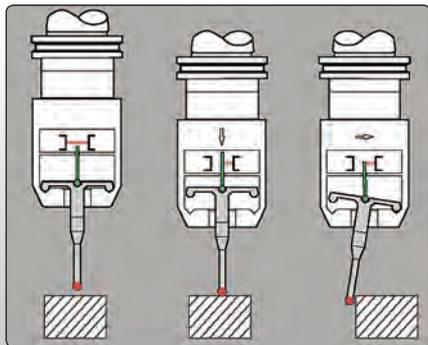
Measuring mechanism of the workpiece measuring probe with optoelectronic signal generation [Blum]
